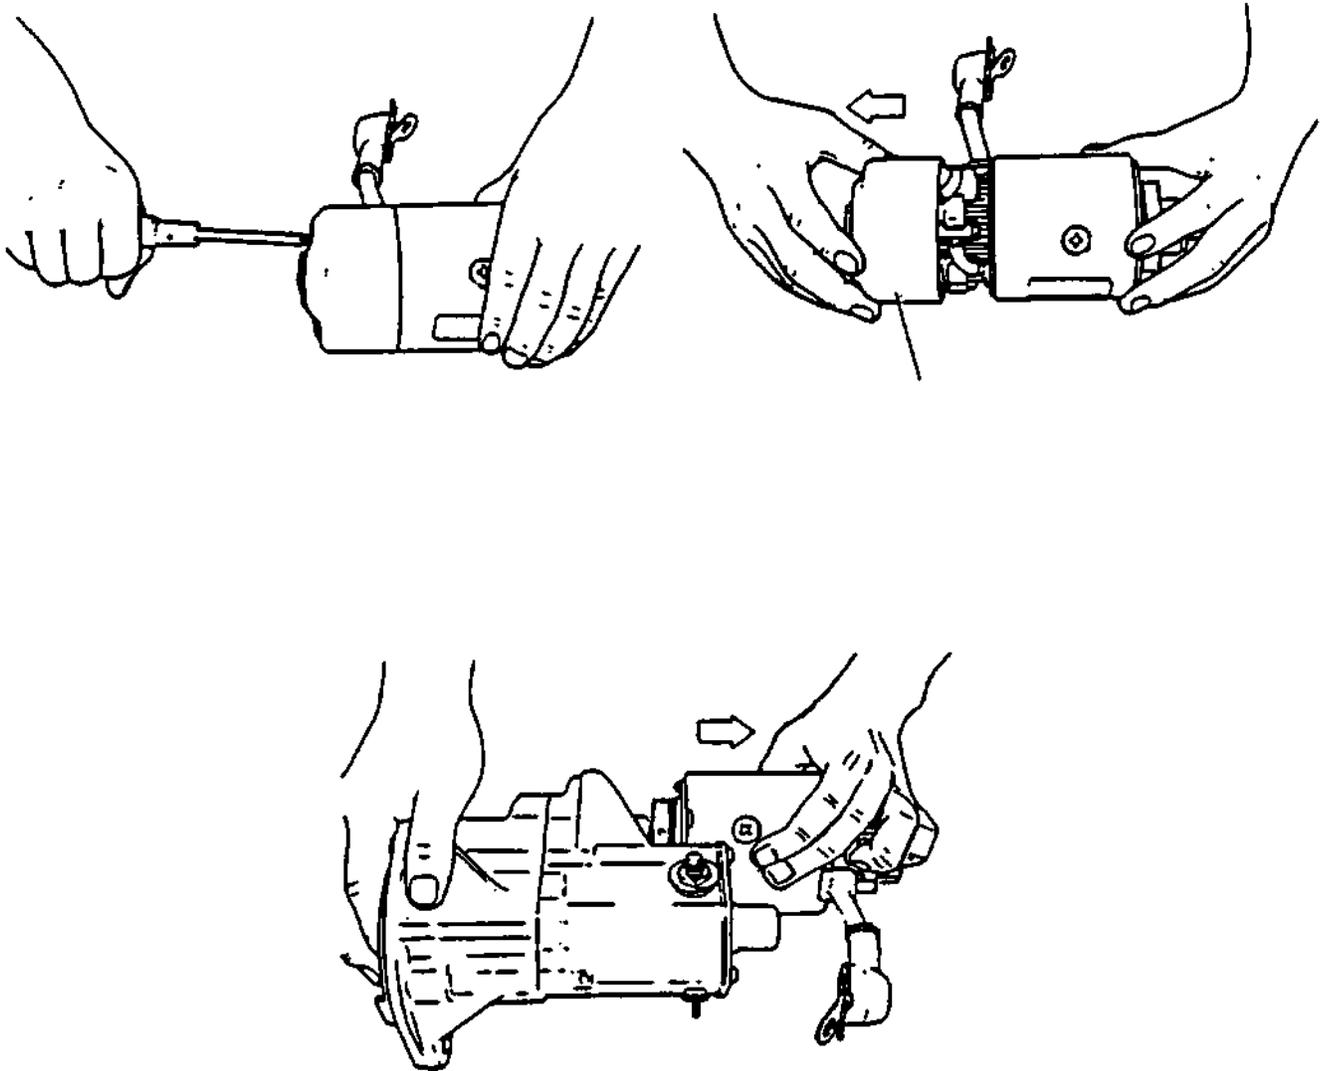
Removing Starter End Frame and Yoke Assembly (Typical)
